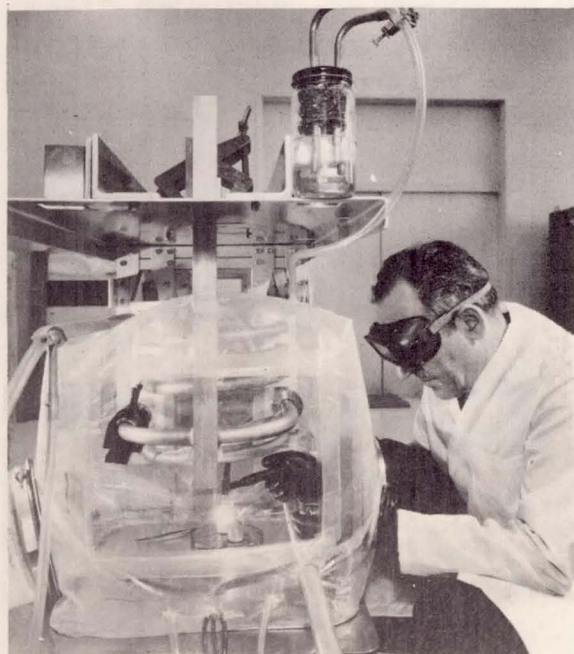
Plastic-bag technique in inert-gas welding.
